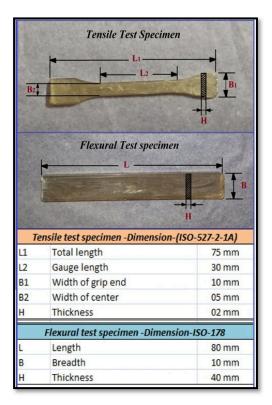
Dimensions of injection moulded specimens for tensile and flexural measurements as per ISO standards.
